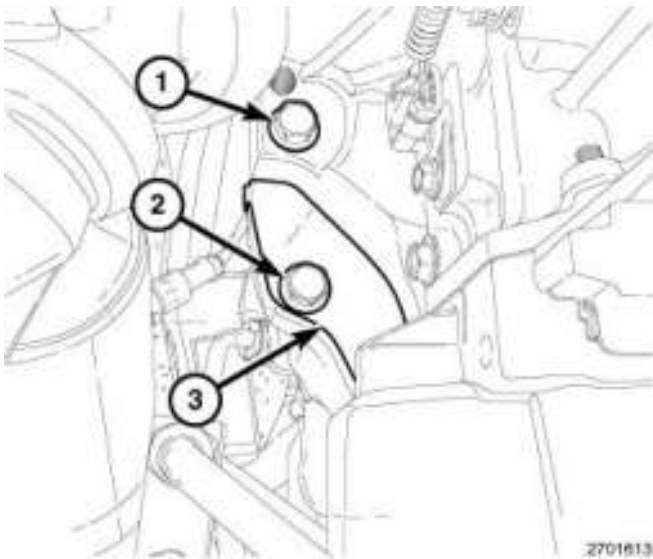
Side Engine-To-Transmission Bolt, Transmission Dust Shield Retaining Bolt & Dust Shield
